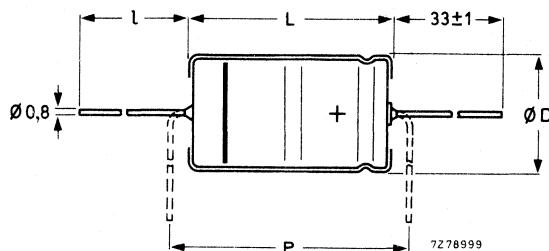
Style 1; see Table 1a for dimensions D, L, I and P.
